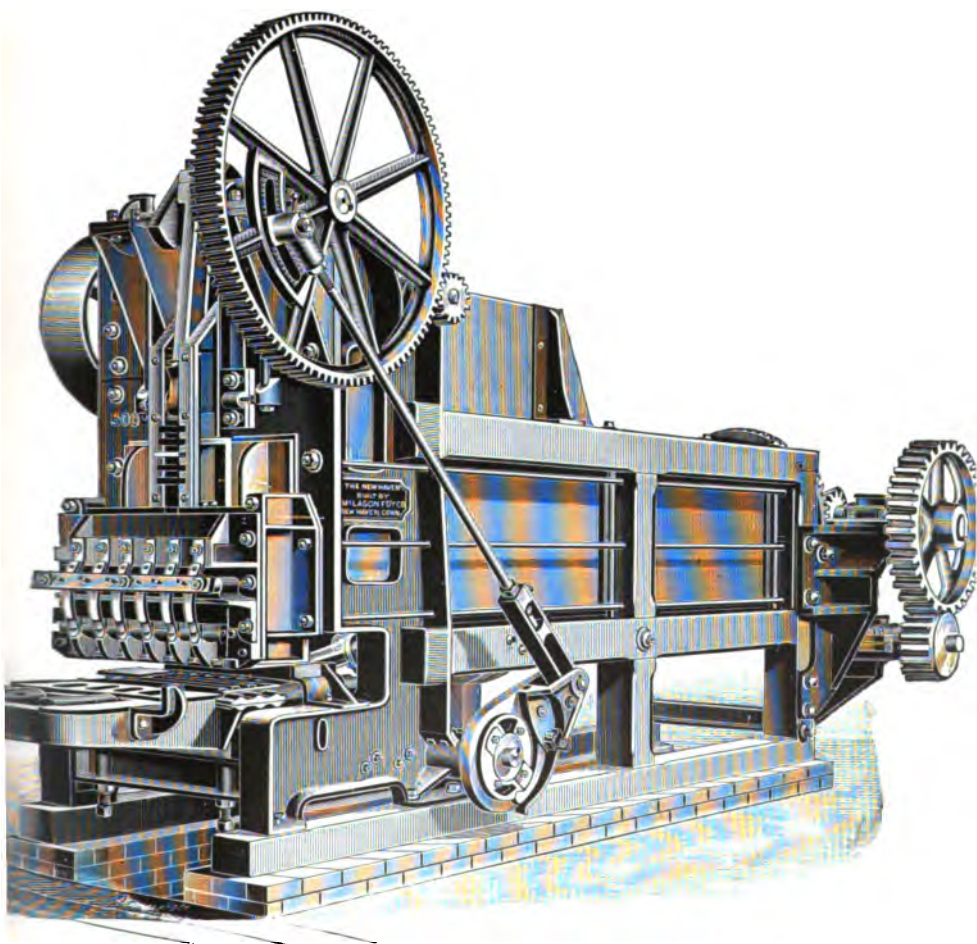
PLATE X. — NEW HAVEN NO. 2 BRICK MACHINE.
